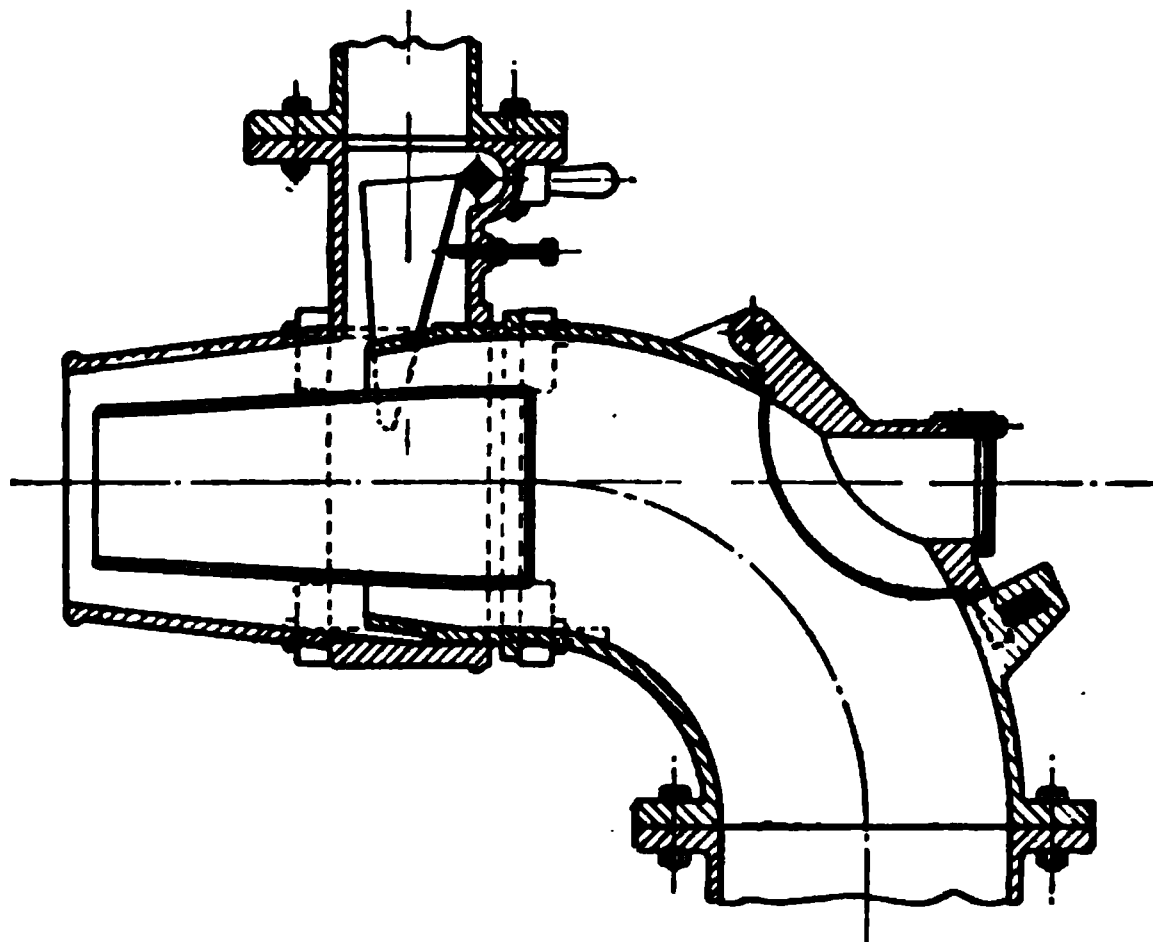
Type A pulverized fuel burner of the American Industrial Engineering Company, Chicago, Ill.
